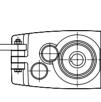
Mounting the rubber buffer (Option G and/or VG) on parallel shaft gear units
